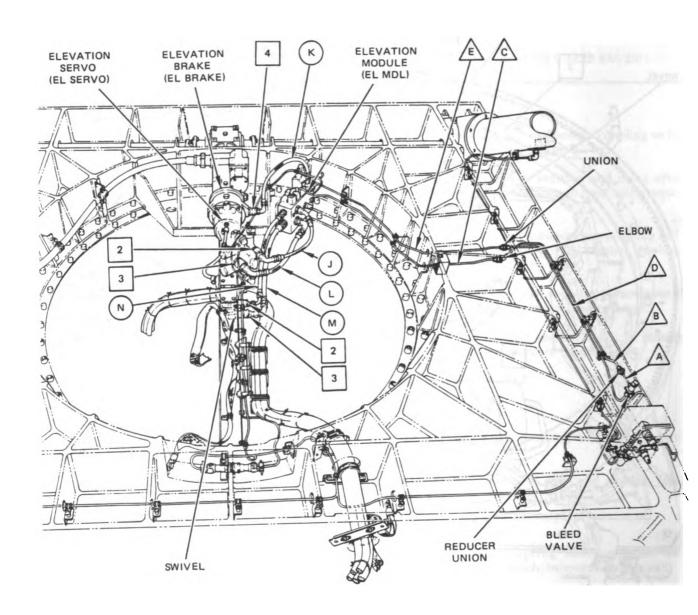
Hydraulic Hose and Tube Location (Sheet 2 of 2)
